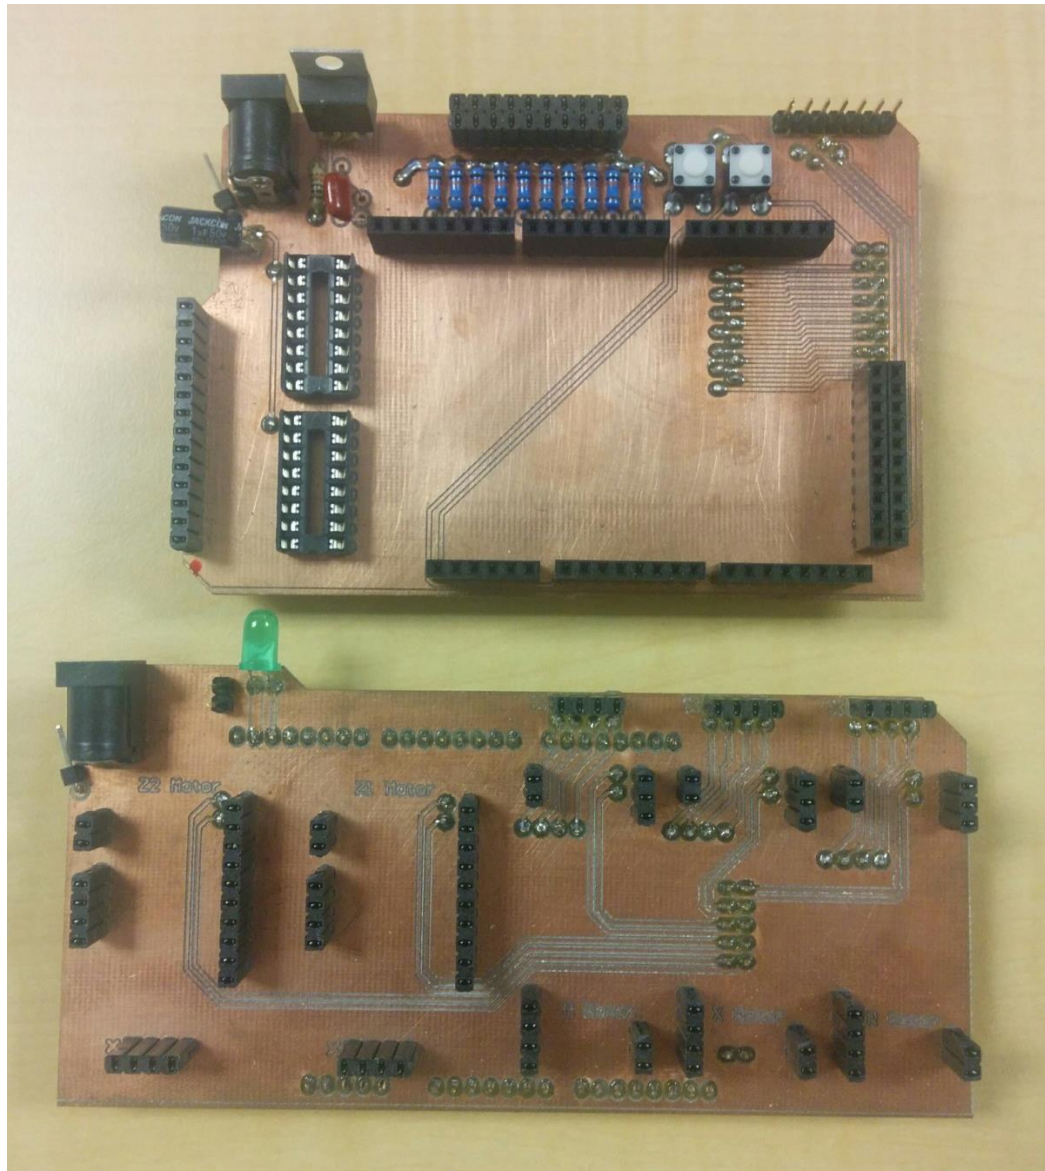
Prototype 2 circuit boards. Upper board is print head control, lower board is motor control
